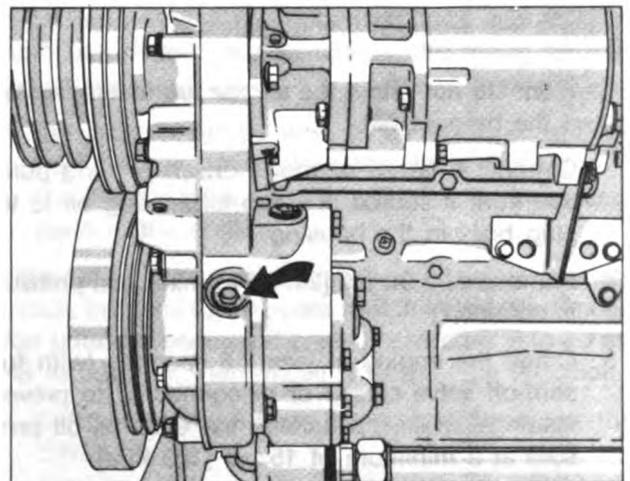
, (OM1001L). Lubricating system priming point—NT-855 C.I.D. Engine
